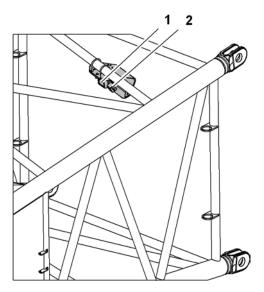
Camera on the Derrick boom base section for monitoring the Derrick winch
